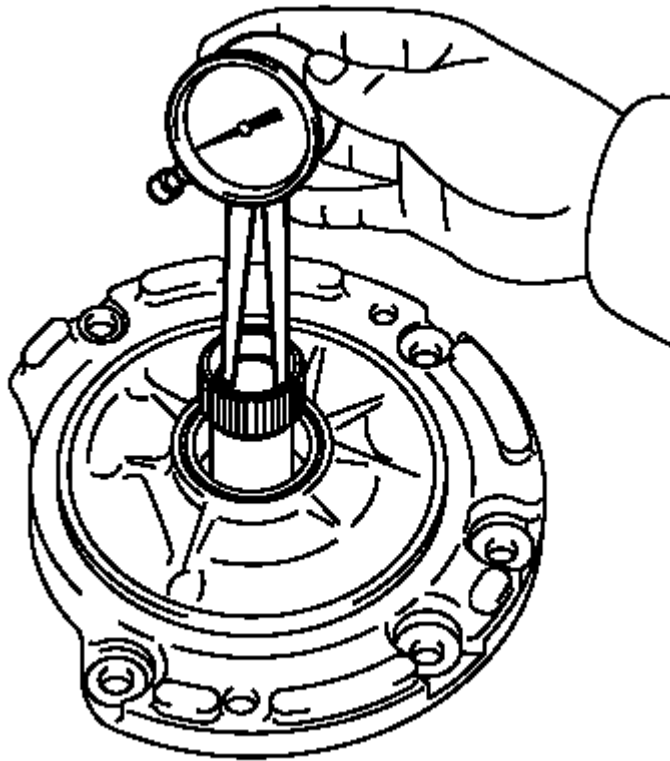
Measuring Inside Diameter Of Stator Shaft Bushings
